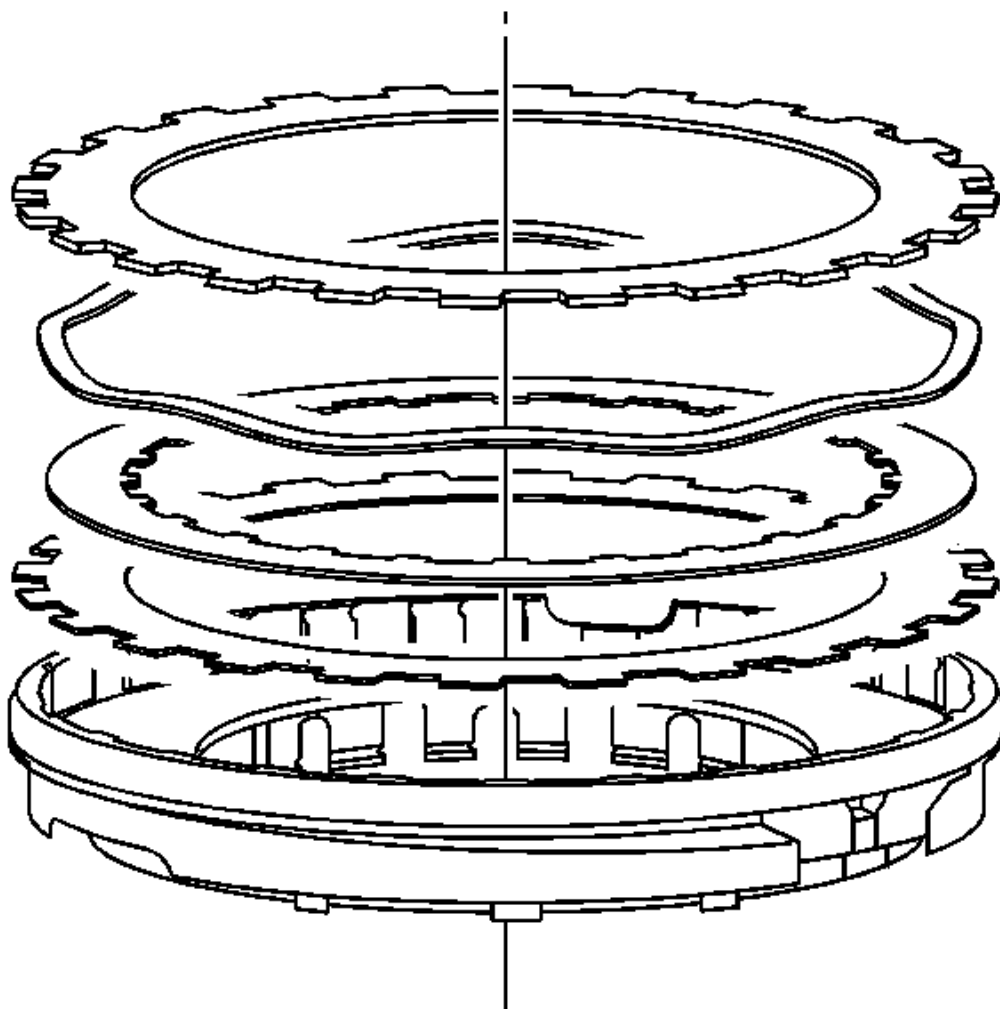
View of 3-5 Reverse Clutch Plate
